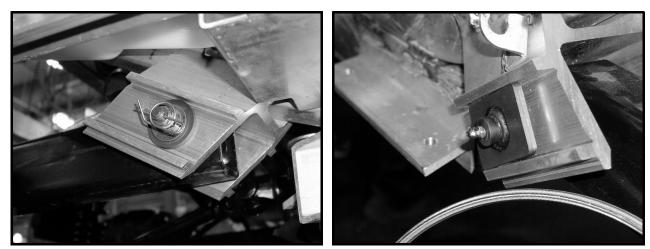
Swing Arm Bolt, Nut and Rue Pin
